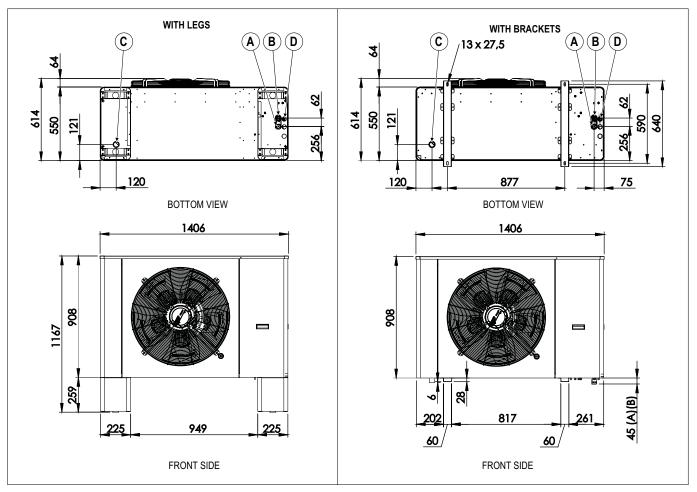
(Dimensions of S-series - SP - SP-T - with legs and with brackets)
